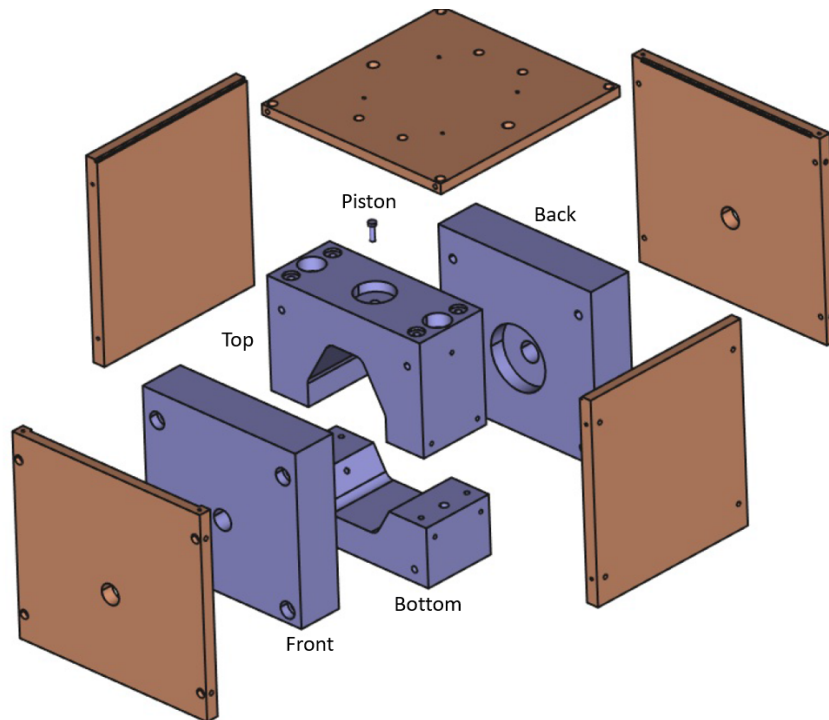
CAD assembly of the enclosure to house the Fabry-Pérot cavity. Blue parts constitute the inner enclosure made of Invar where the cavity is housed. Brown parts constitute the copper shield with polished gold layer that acts as a thermal shield to reduce the effect of temperature fluctuations on the cavity.
